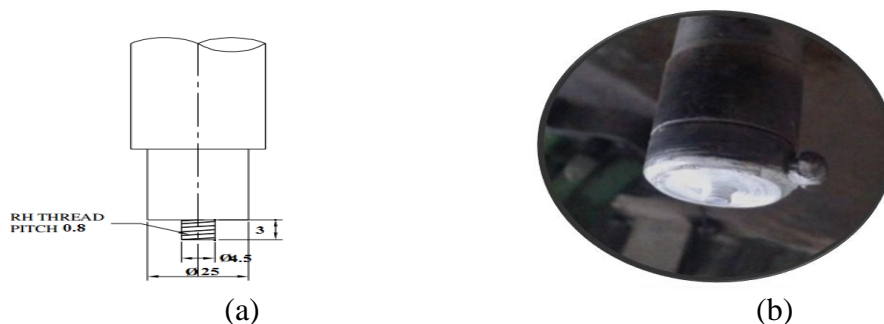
(a) Dimension of the tool used in FSP (b) Typical tool used in process.
